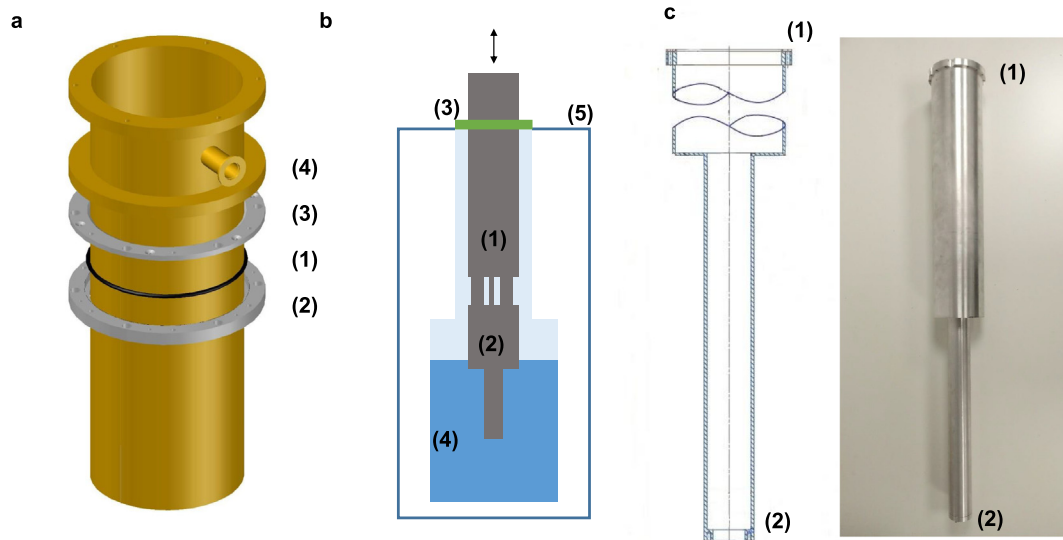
(a) Schematics of the sliding seal assembly consisting of an O-ring (1) and a bottom stainless steel piece (2) and a cap (3). The bottom part has threaded holes that allow fixing (3) in such a way as to compress the O-ring and additional holes allowing to fix the insert into the cryostat. (b) Schematics of a sliding seal (1) and inner vacuum chamber (2) inserted through the O-ring assembly (3) into a liquid Helium bath (4) inside a cryostat (5). (c) Schematic drawing and photo of an Aluminium inner vacuum chamber, with the top (1) Indium seal assembly to connect the chamber to the cryostat and a bottom Indium seal (2) as a tap.
